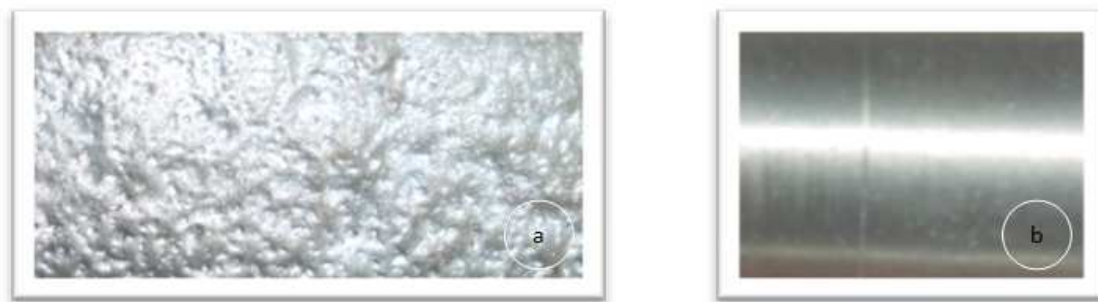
As cast surfaces (a) before and (b) after machining (turning) on lathe
